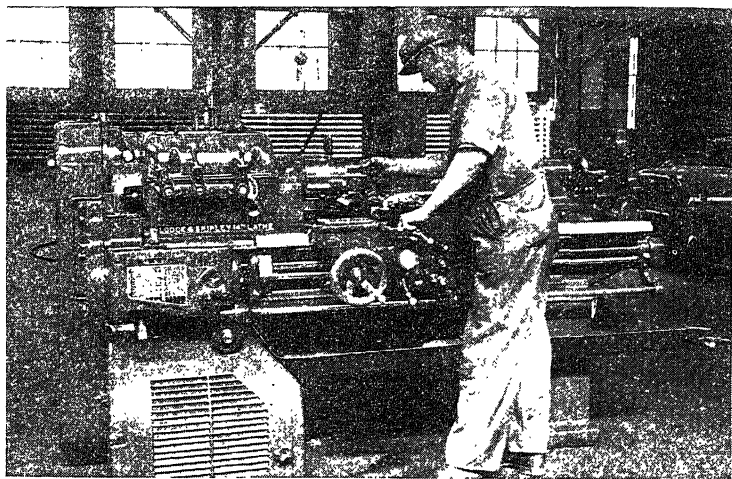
Turning in a 14-in. lathe. (Courtesy of Lodge & Shipley Machine Tool Company.)
